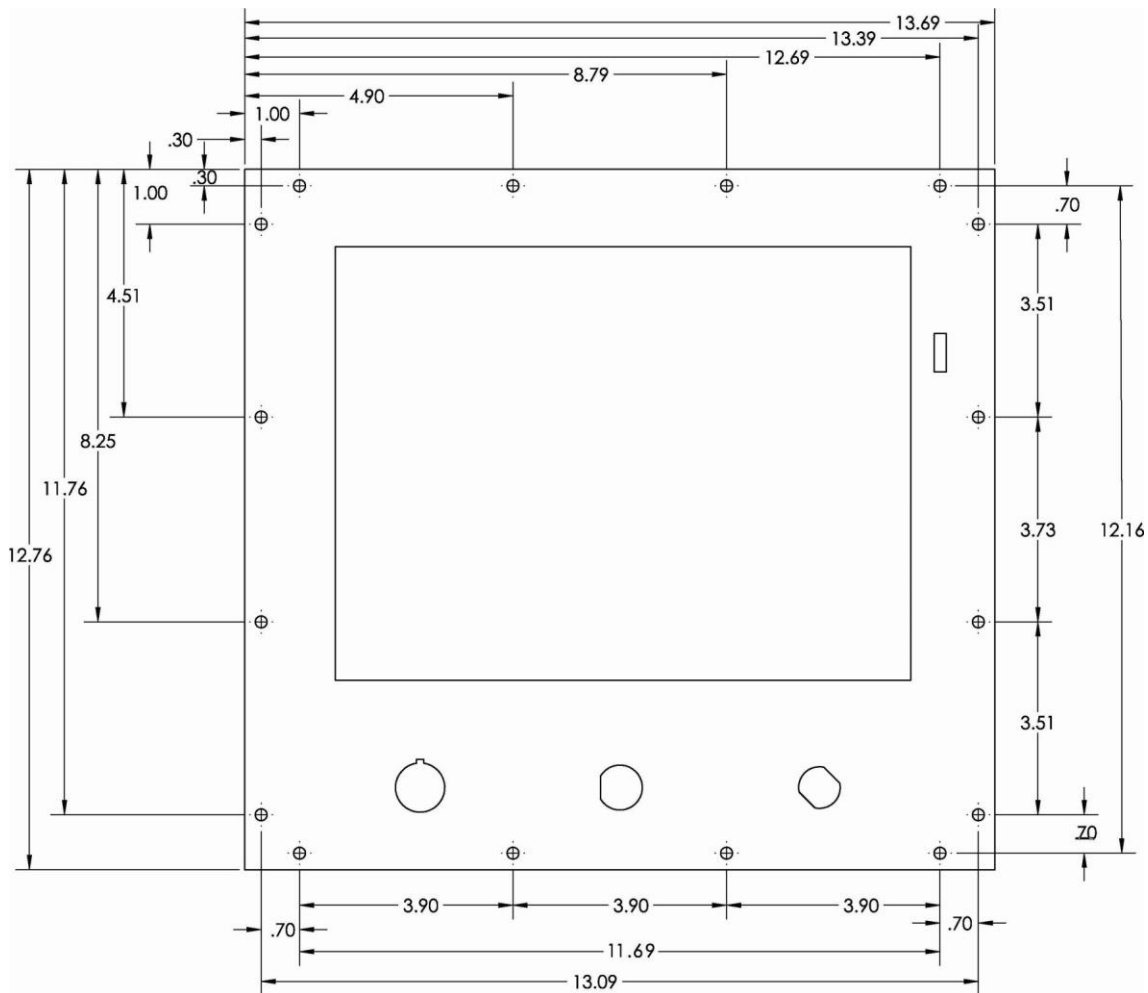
SmartPAC PRO Panel Mount Dimensions
